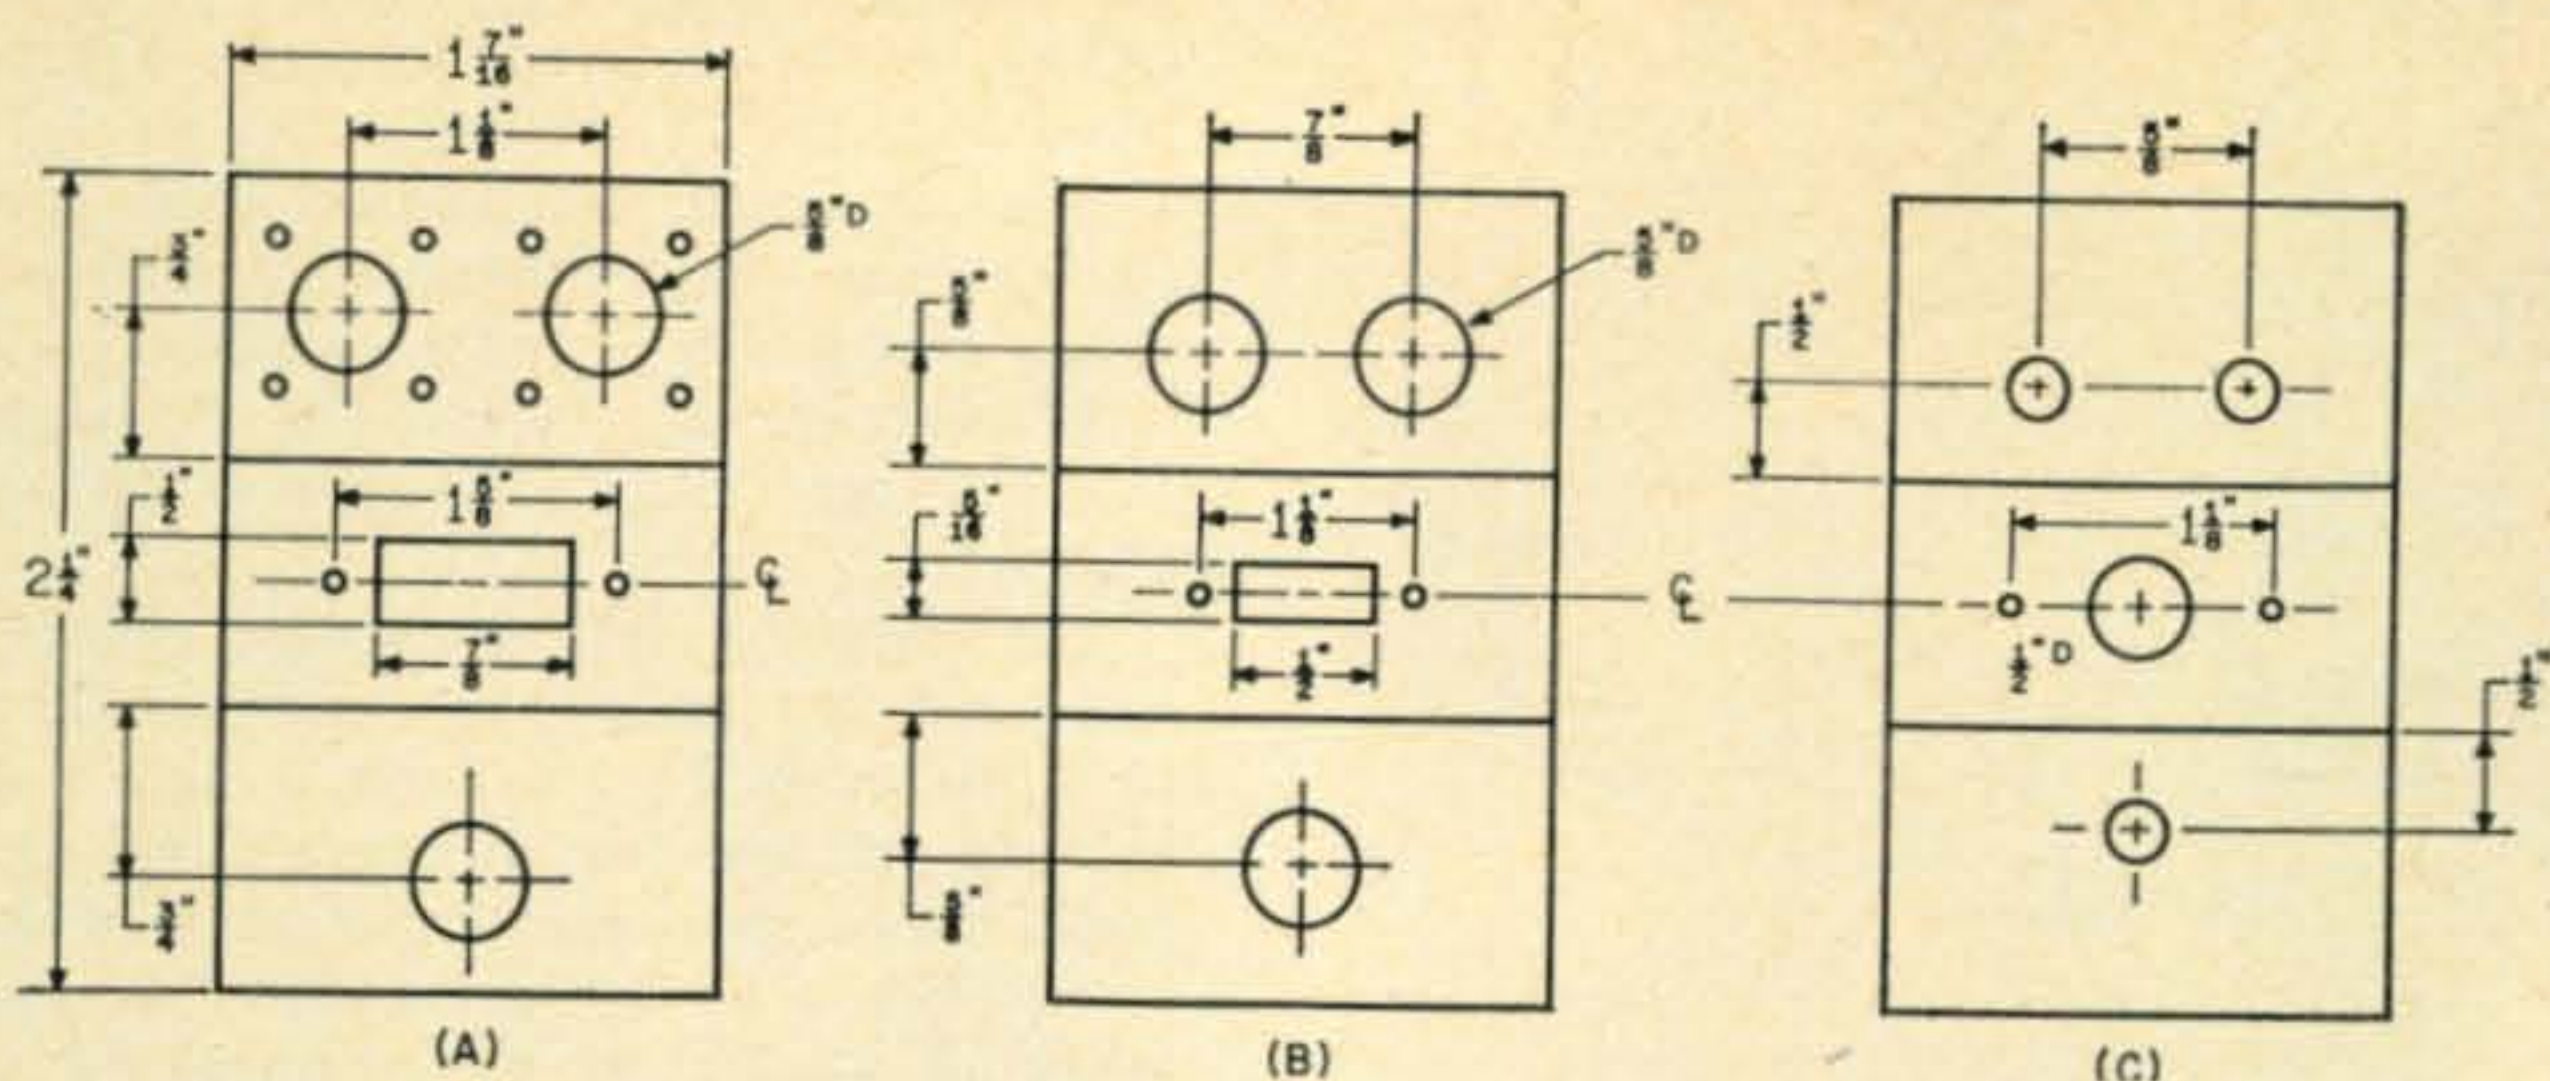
Dimensions for locating connector holes and switch cutouts of the Finger-Tip switches as constructed in LMB M-00 boxes. The drawings are shown in a flat plane with the top panel of the box represented by the center section; the sides by the adjoining sections. The switch cutout should be centered in each case. The single hole in one side also should be centered between the edges of the corresponding side of the box. (A)—For rocker-type switch and SO-239 connectors (flange of single-
